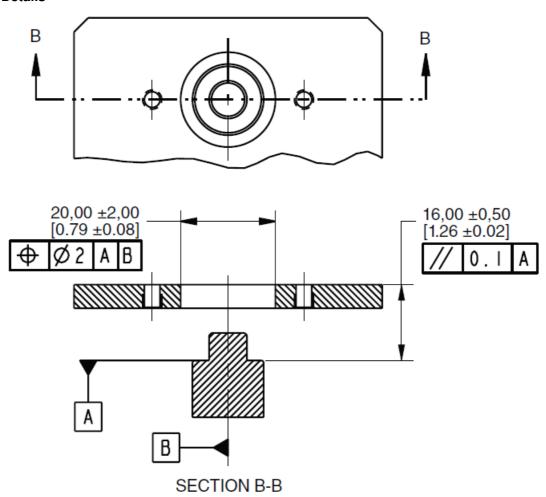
SENSOR AND HOUSED MAGNET ACTUATOR MOUNTING INFORMATION (FOR REFERENCE ONLY: IN/[MM].)
